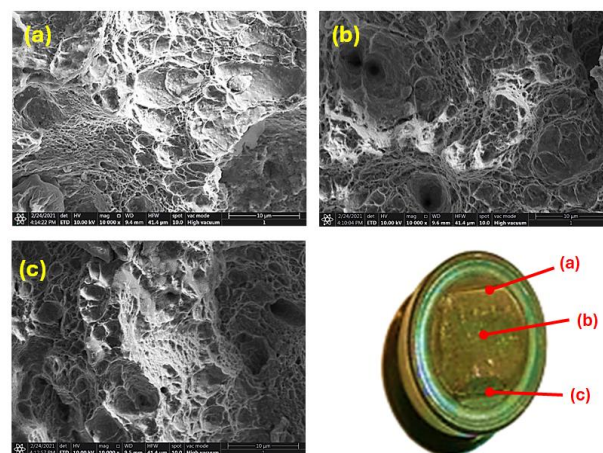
Fractography of follower with 10,000x magnification at the fracture regions: (a) initiation, (b) middle, and (c) final.
